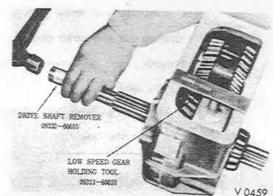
Removing the drive shaft from the transfer case with special tool.
